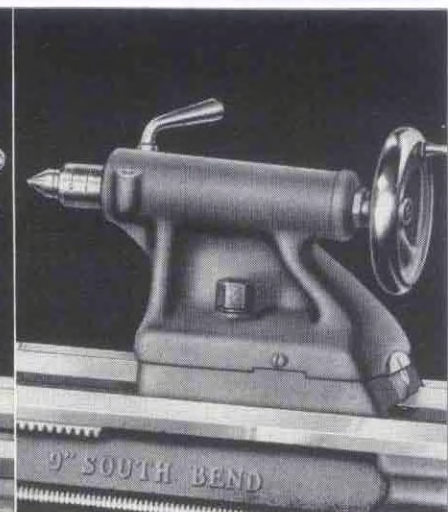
Tailstock Design Used on 9" Swing Lathes
